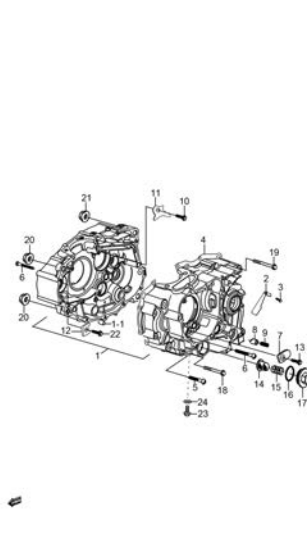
CRANKCASE COVER (P05-S040-0043)
